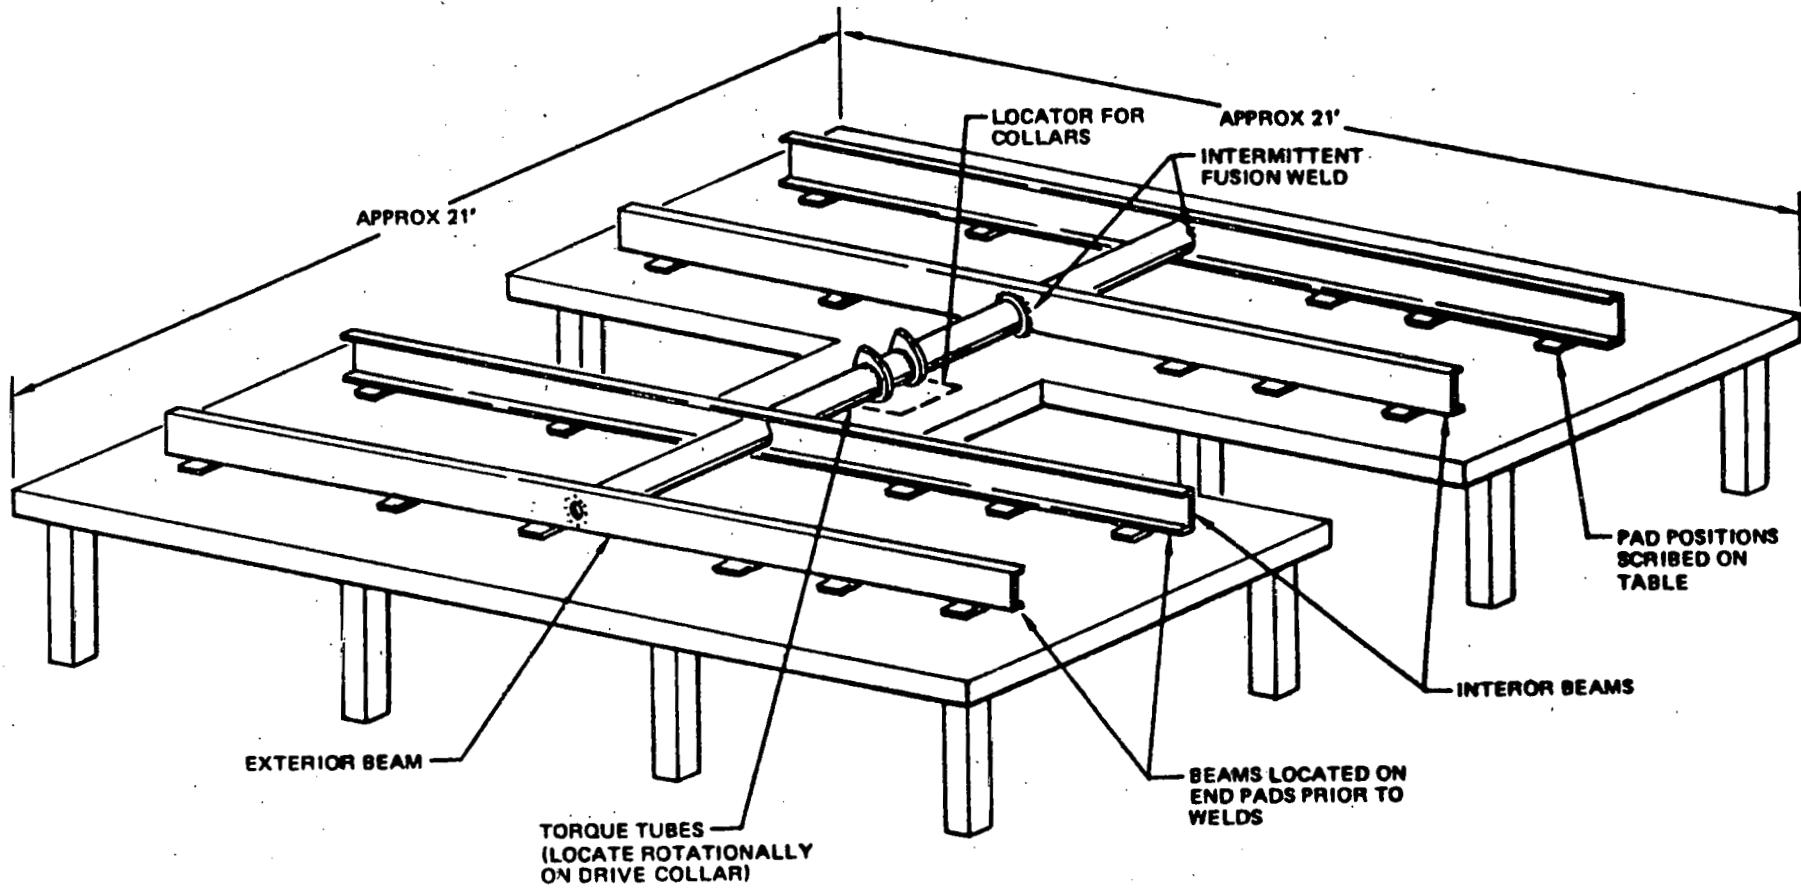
Site Plant, Beam/Torque Tube Assembly Station (Typical)
